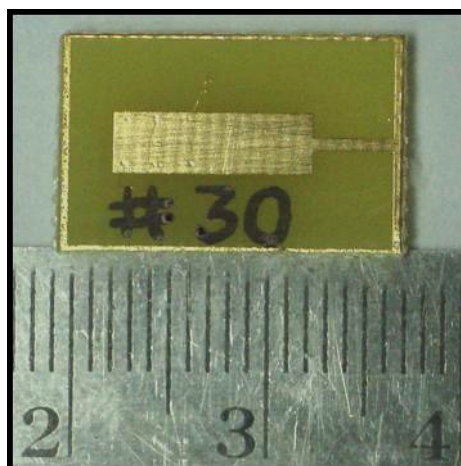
Electroless Ni-Au coated PCB used as the wire bond pad.
